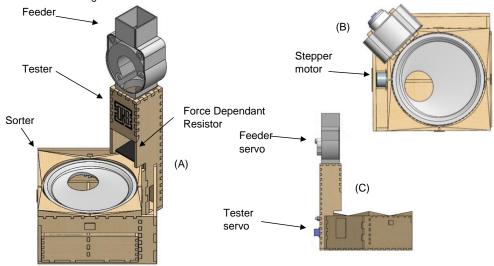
FULL FINAL RENDERING OF PROTOTYPE (A) SIDE VIEW (B) TOP VIEW (C) ISOMETRIC SIDE VIEW
